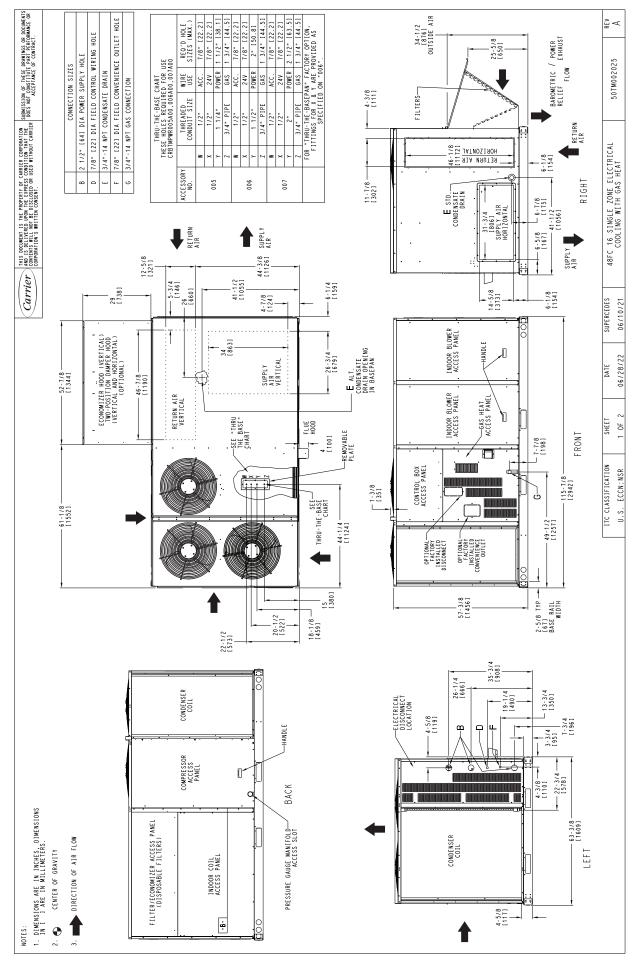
48FC\*\*16 Unit Dimensional Drawing
